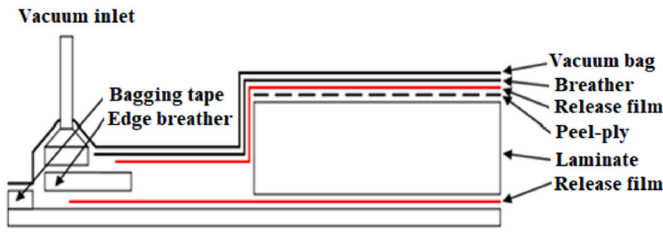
Vacuum bagging scheme of the manufactured panel.
